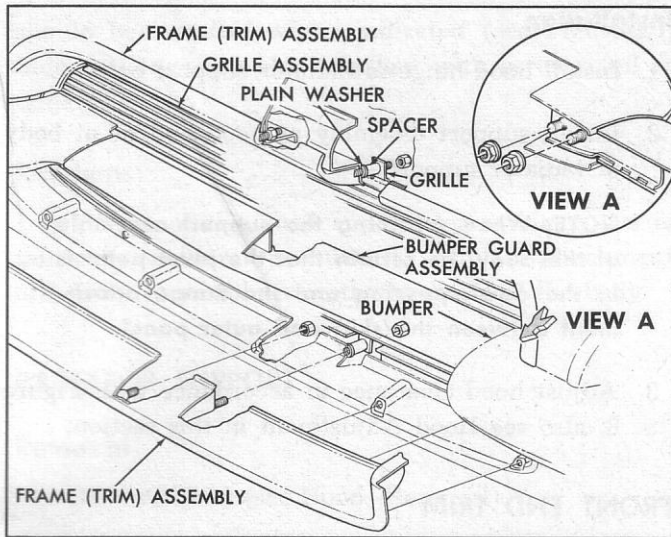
Grille and Frame (Trim) Assembly Attachment
